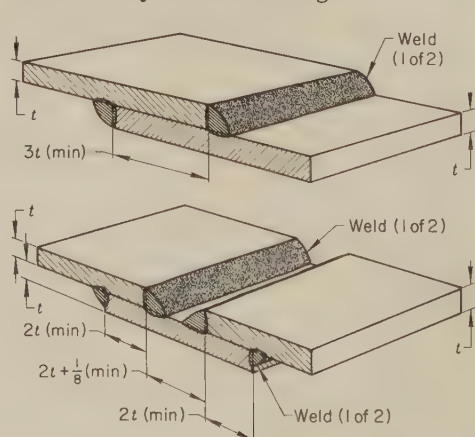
Preferred types of lap joints for arc welding of aluminum alloys
